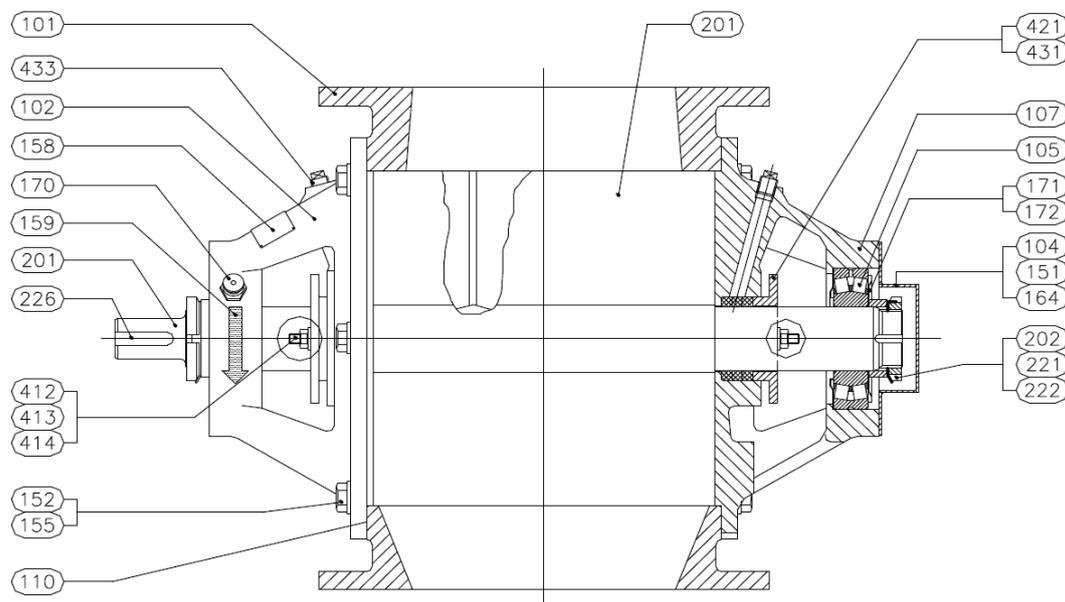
General assembly AL-series / BL-series HT 250°C
